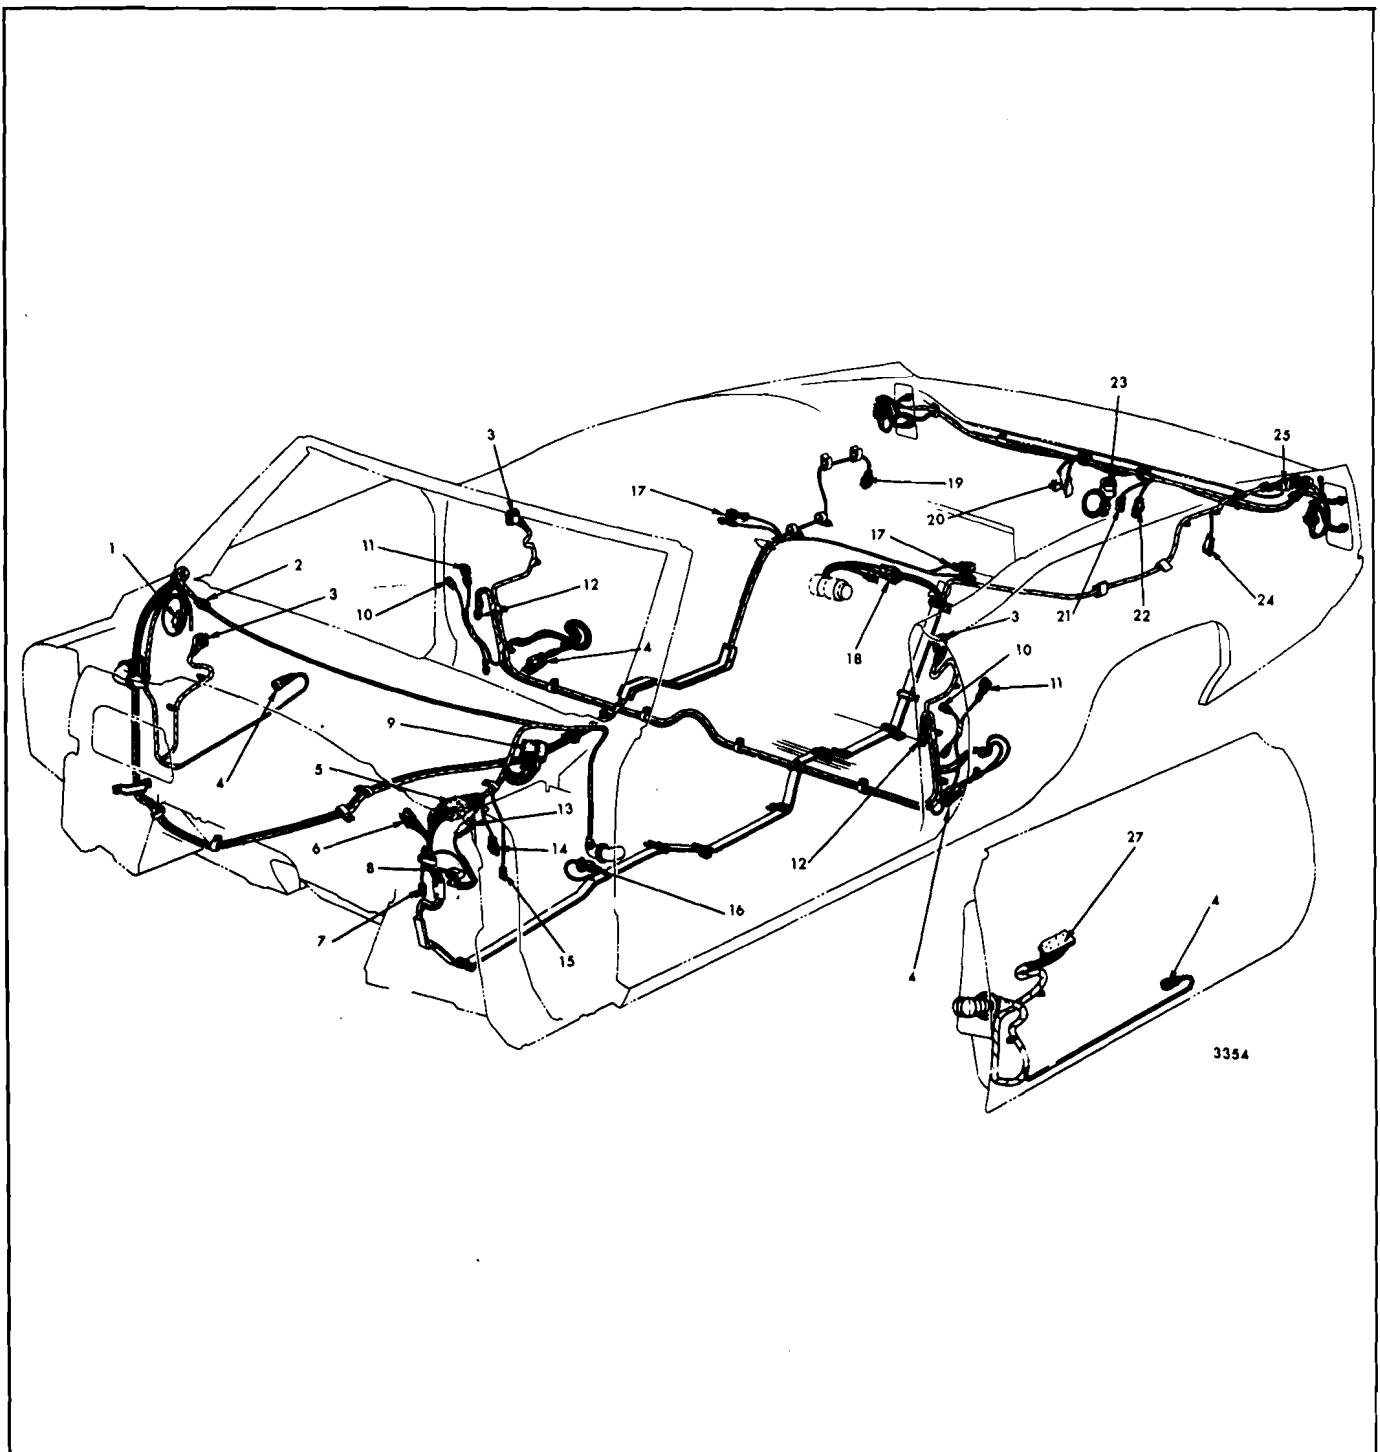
Oldsmobile "B-67" Body Wire Routing (Typical)
